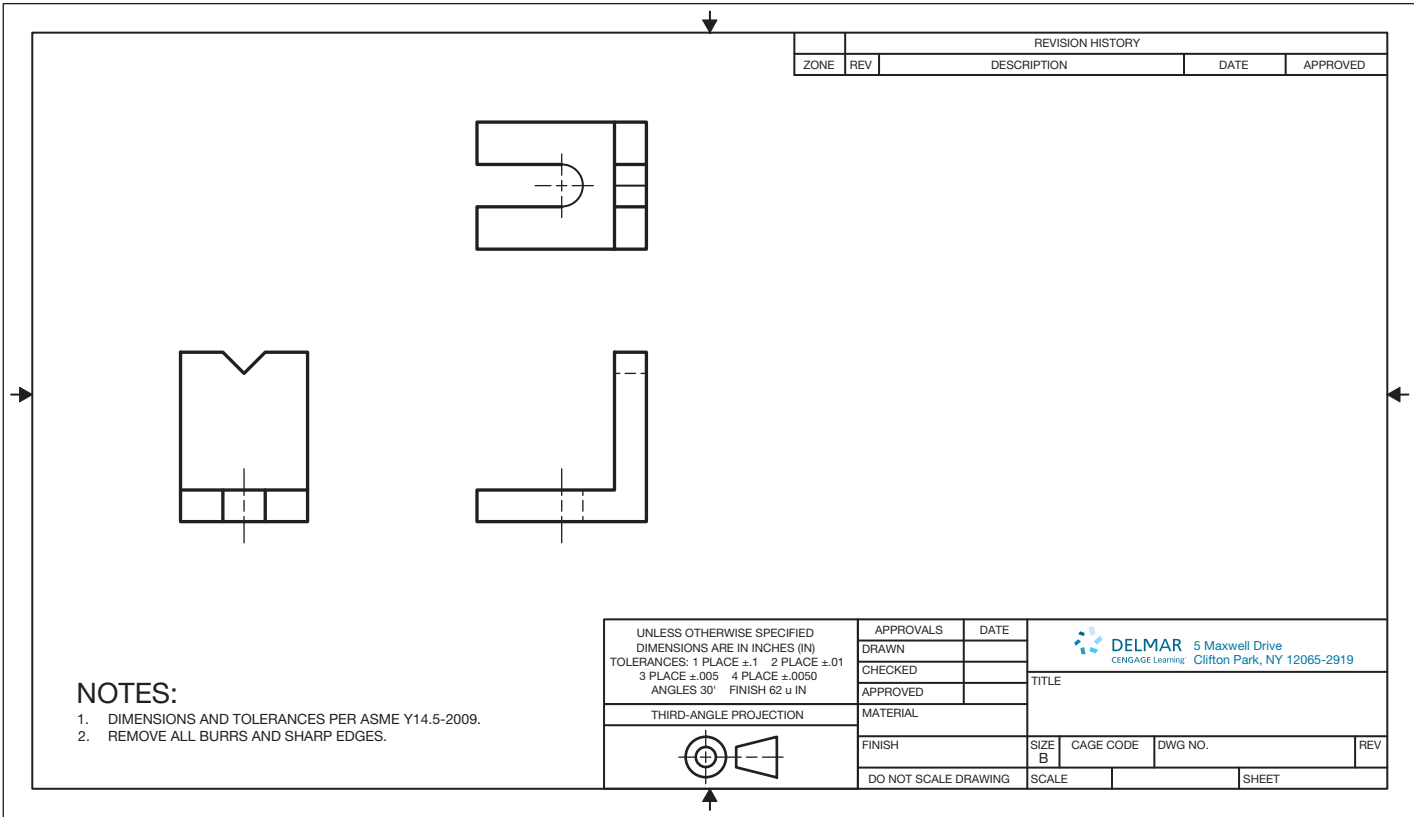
Completed multiview drawing without dimensions or title block content filled in. © Cengage Learning 2012
